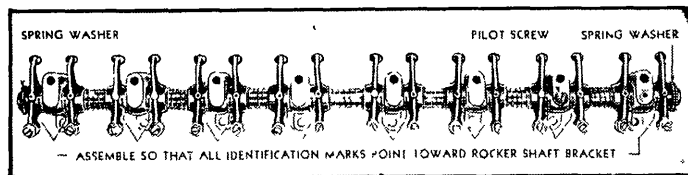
Rocker arm assembly, 1938-42 Series 40, 50
